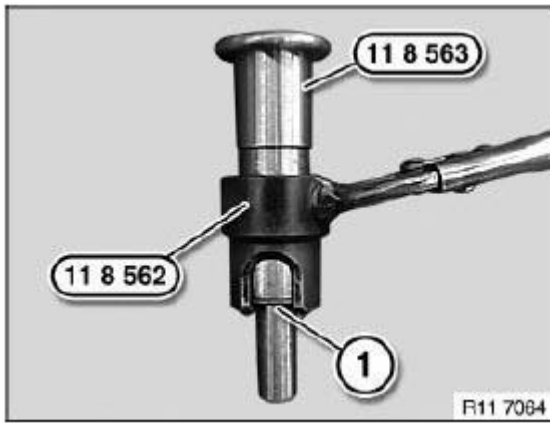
Sliding Special Tool 11 8 563 Up To Piston Pin Circlip
